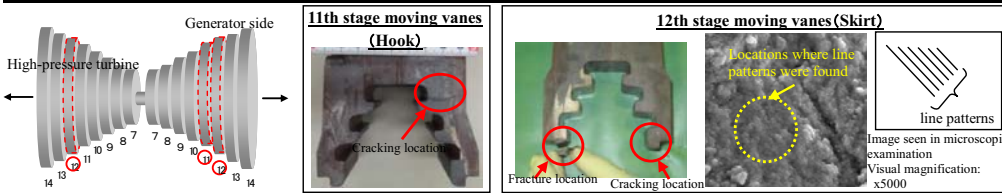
Inspection results for moving vane mounting assemblies (on the moving vane side)
